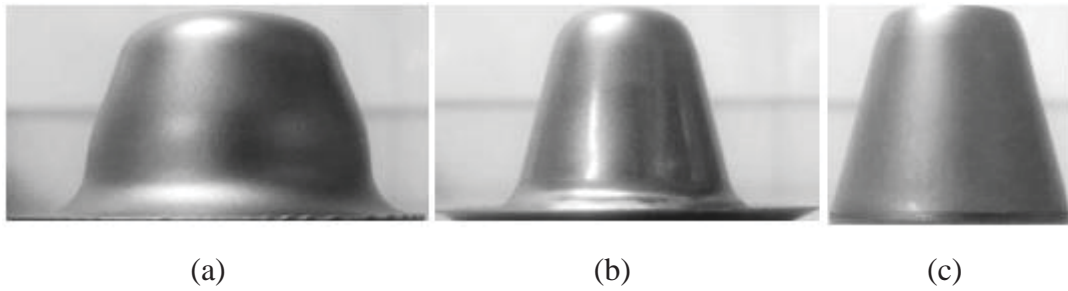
Shapes of outer shell at the end of (a) first drawing, (b) second drawing, (c) trimming.
